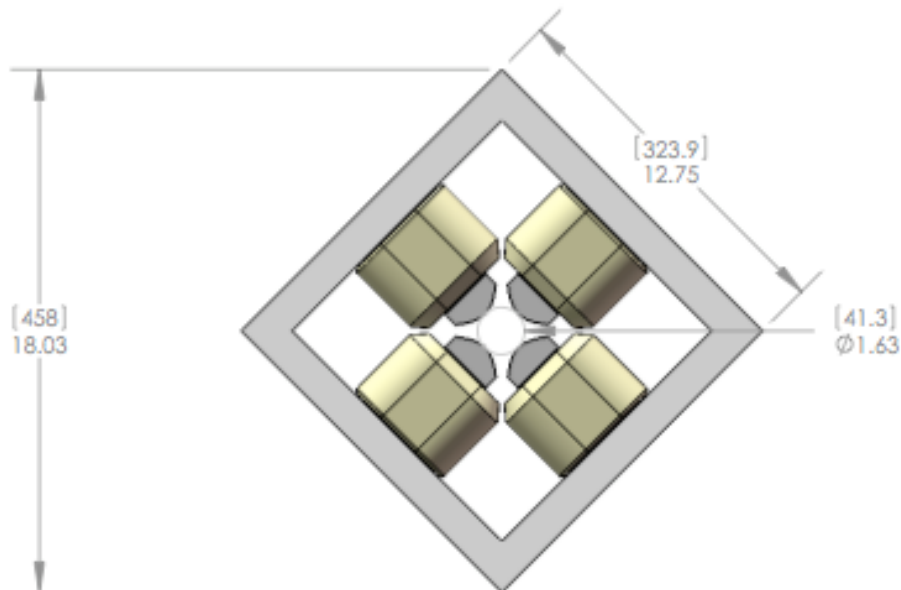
Cad drawing of the quadrupole magnets provided by Radiabeam.
